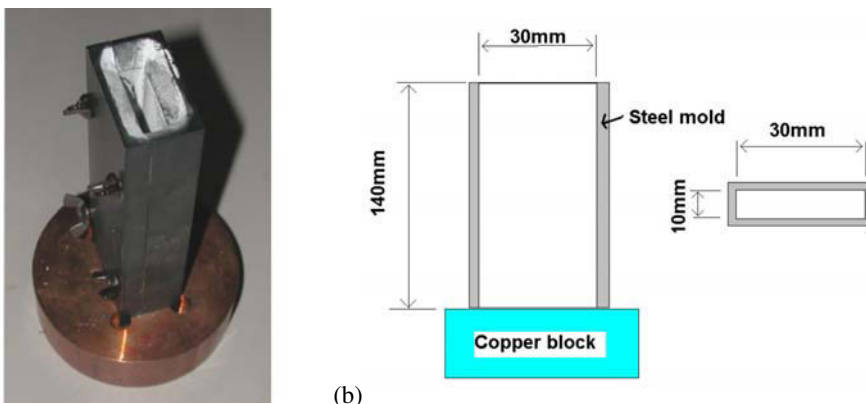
Casting mold (a) photograph and (b) schematic, used to obtain ingots for weld insert production.
